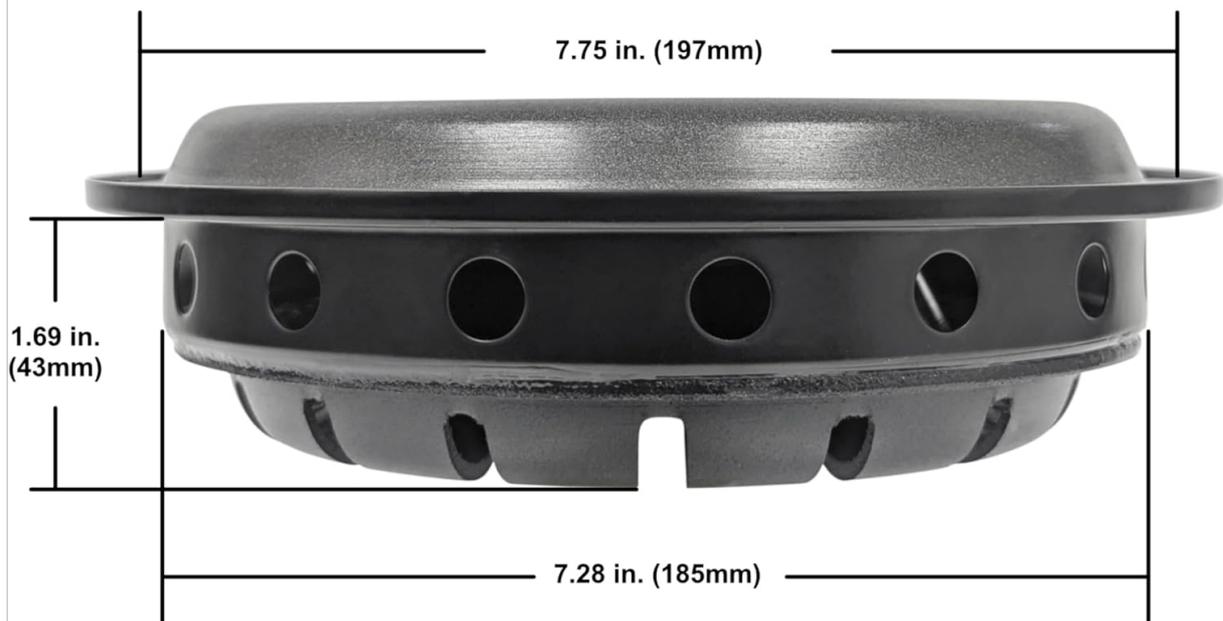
Mounting dimensions of the SLAPS-M8v2 without gasket (7.75 in. / 197mm outer diameter, 1.69 in. / 43mm depth).
